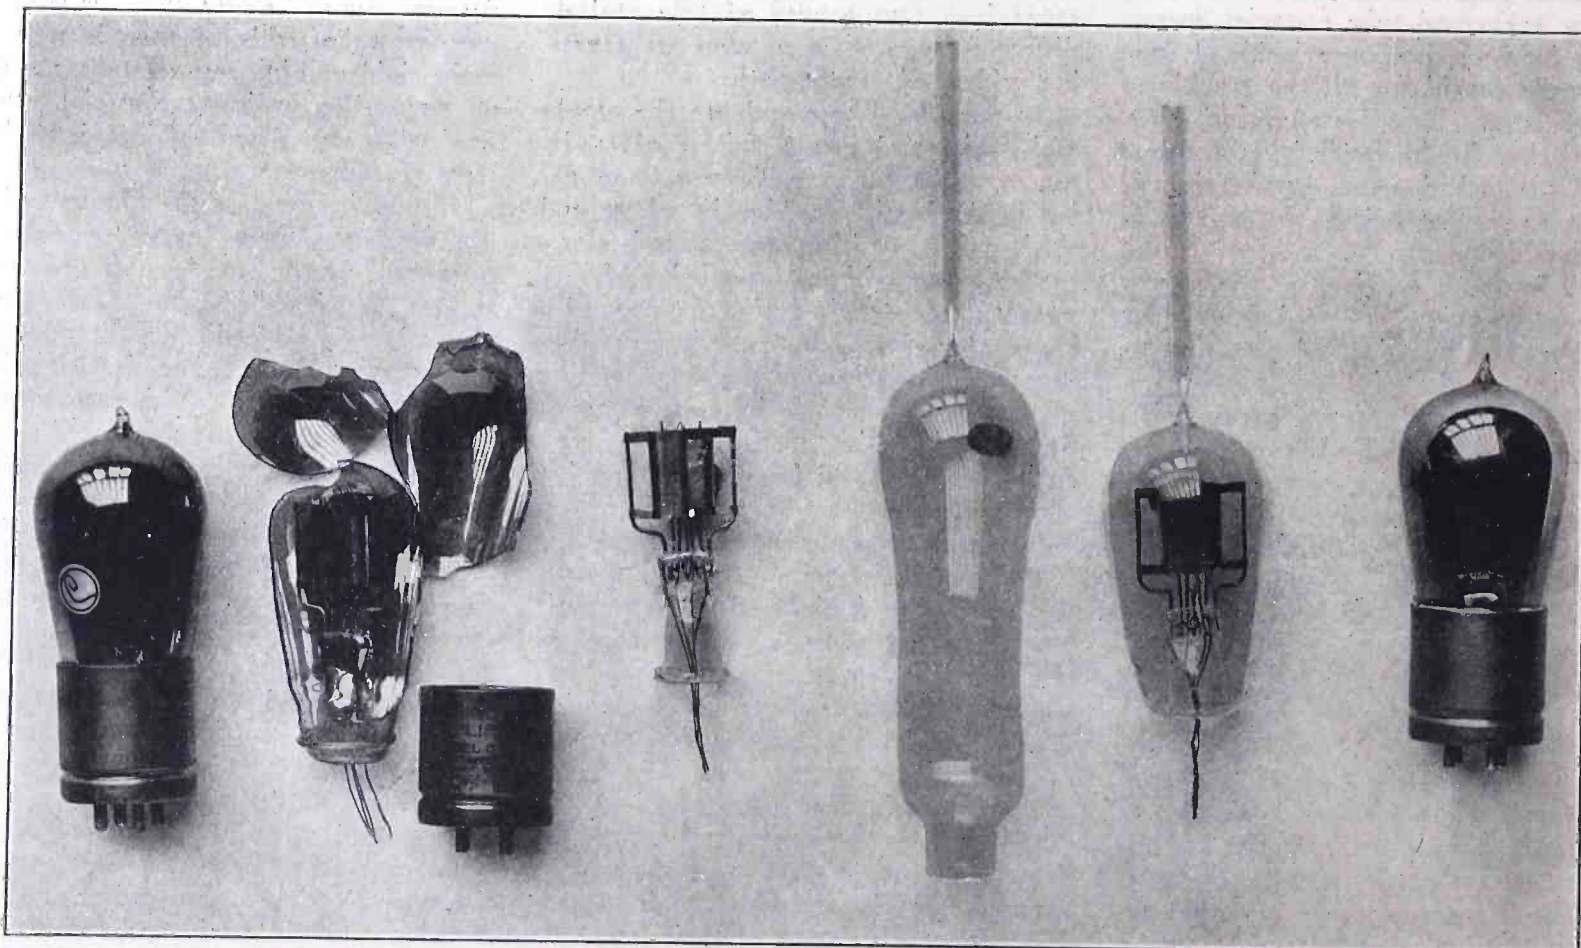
Rejuvenating a Burnt-out Tube. (a) Burnt-out. (b) Broken down. (c) Old stem with new filament. (d) Molded glass bulb. (e) Sealed in. (f) Ready for testing.
